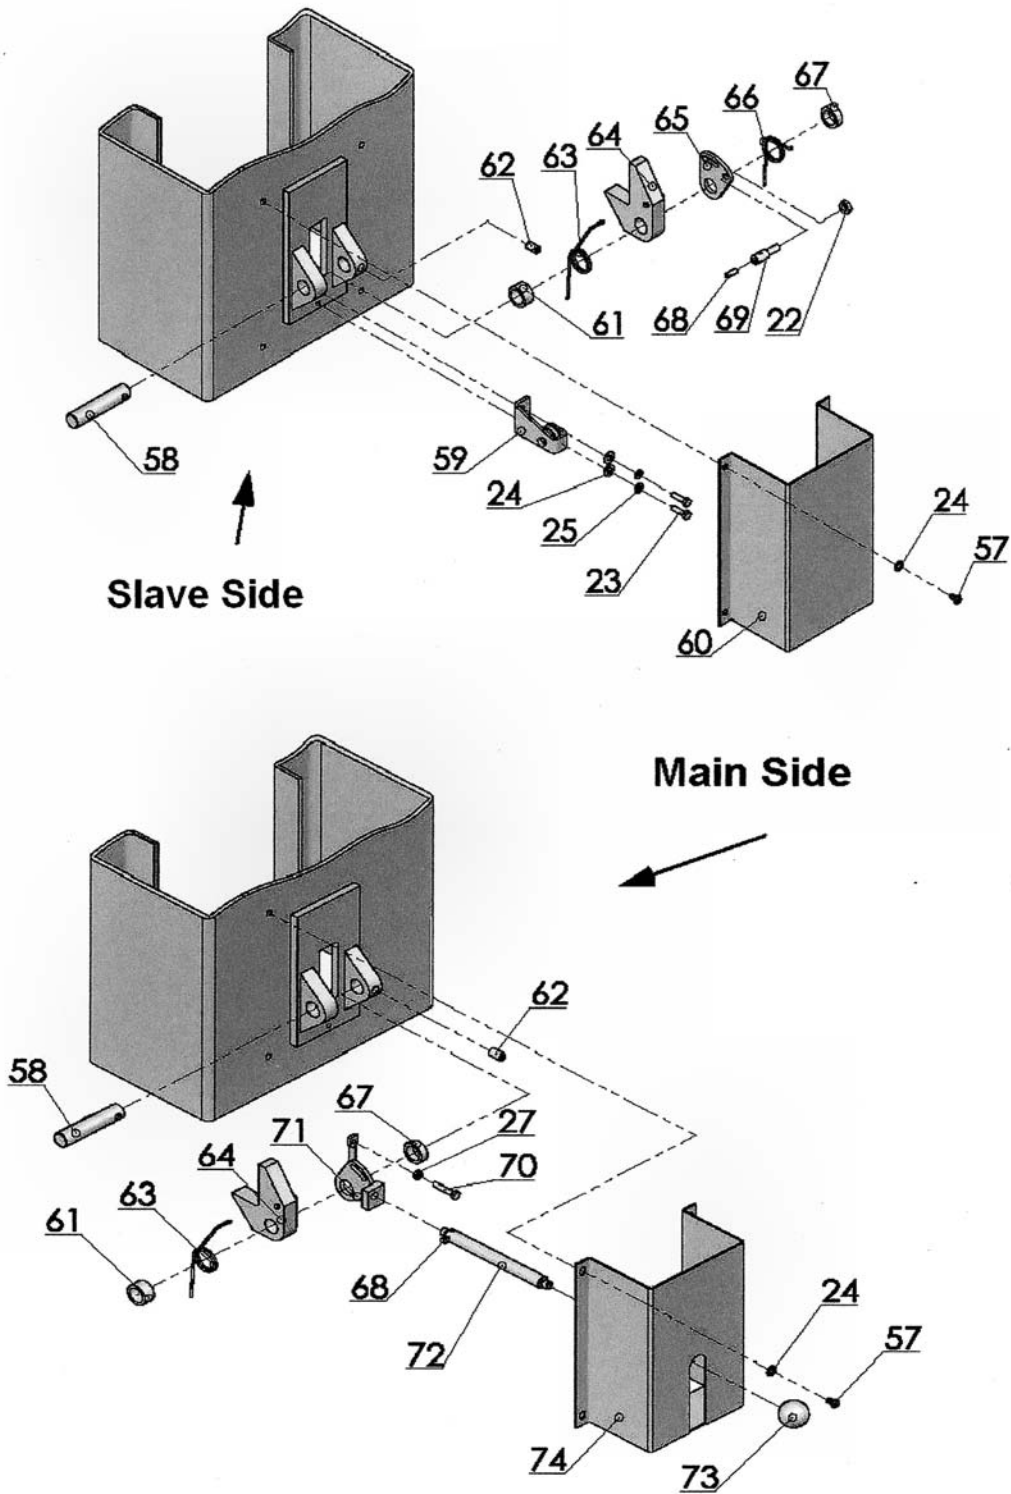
Illustrated Parts Breakdown – Sheet 5 of 6
